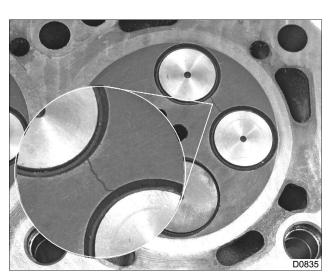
Cylinder head crack between intake and exhaust valves (typical)
